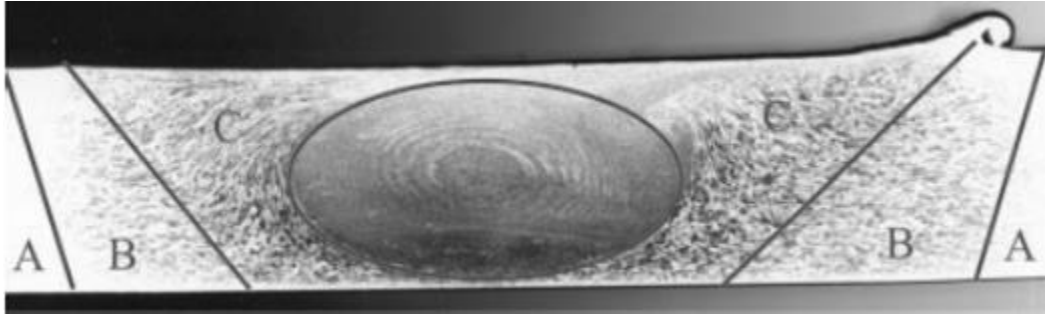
Cross-sectional view of a friction stir weld and its zones: (A) Unaffected parent material, (B) the heat affected zone (HAZ), and (C) thermomechanically affected zone (TMAZ) with weld nugget encircled [2]
